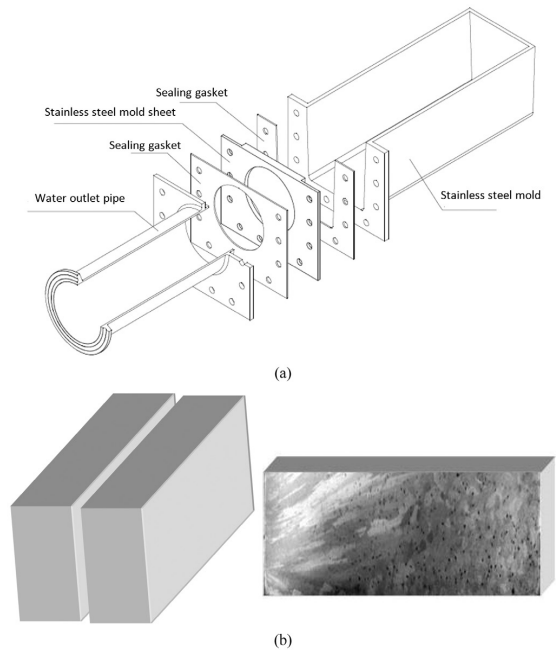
Schematic representation of: (a) assembly of the stainless steel mold and mold sheet set (AISI310); (b) cutting of the ingot for macrostructural revelation.
